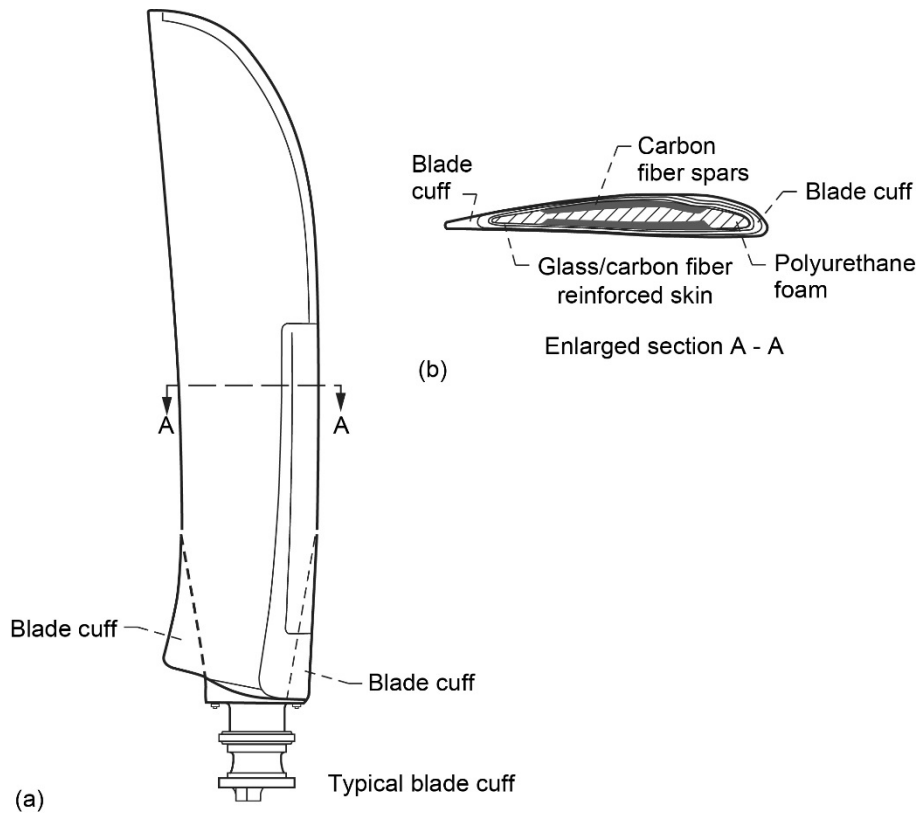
Typical composite blade for shield impact tests. (a) Full blade. (b) Cross section.
